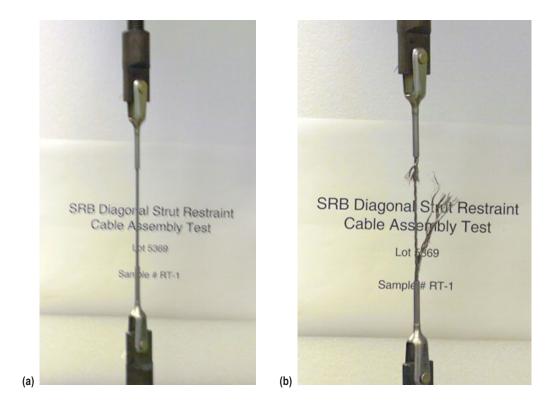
5369–RT–1 (a) before testing and (b) after testing.
